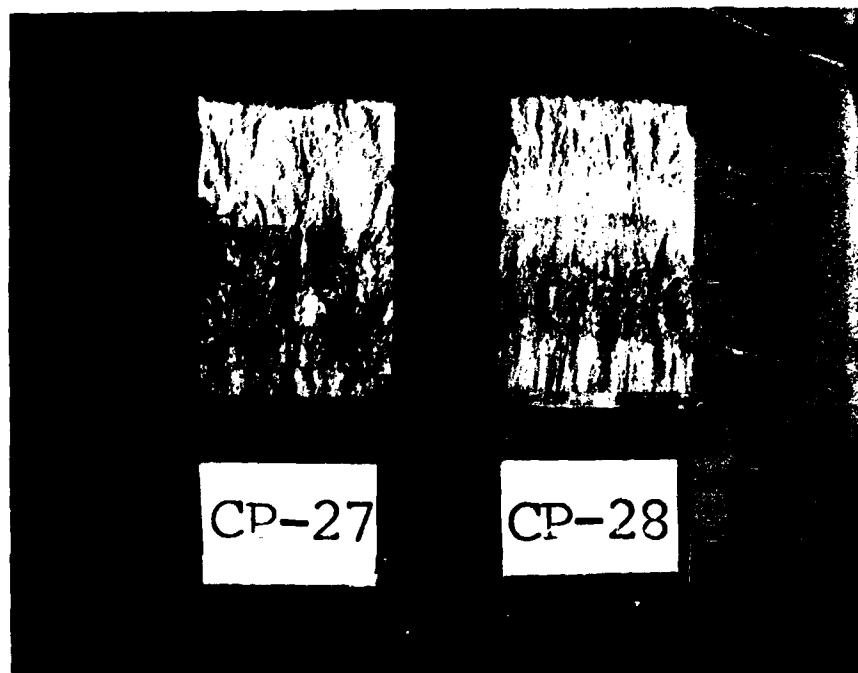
Fracture surface appearance of specimen CP27 and CP28 under Type 4 loading.
